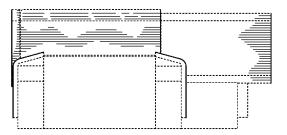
is a left view of the printer shown in FIG. 1; FIG. 5 is a top view of the printer shown in FIG. 1;
